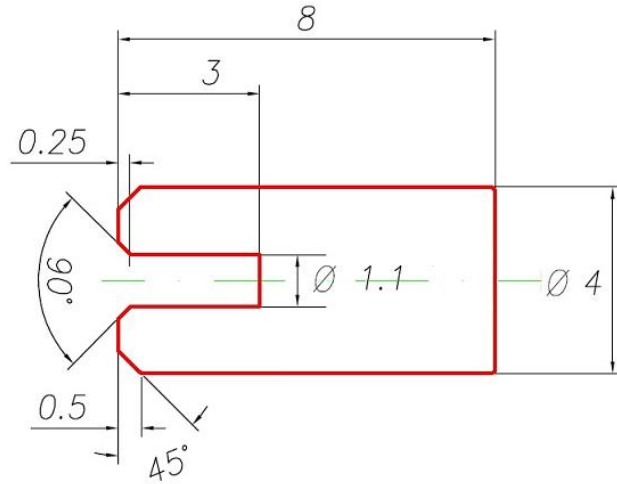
Drawing of the sabot used to accelerate the pellets.
